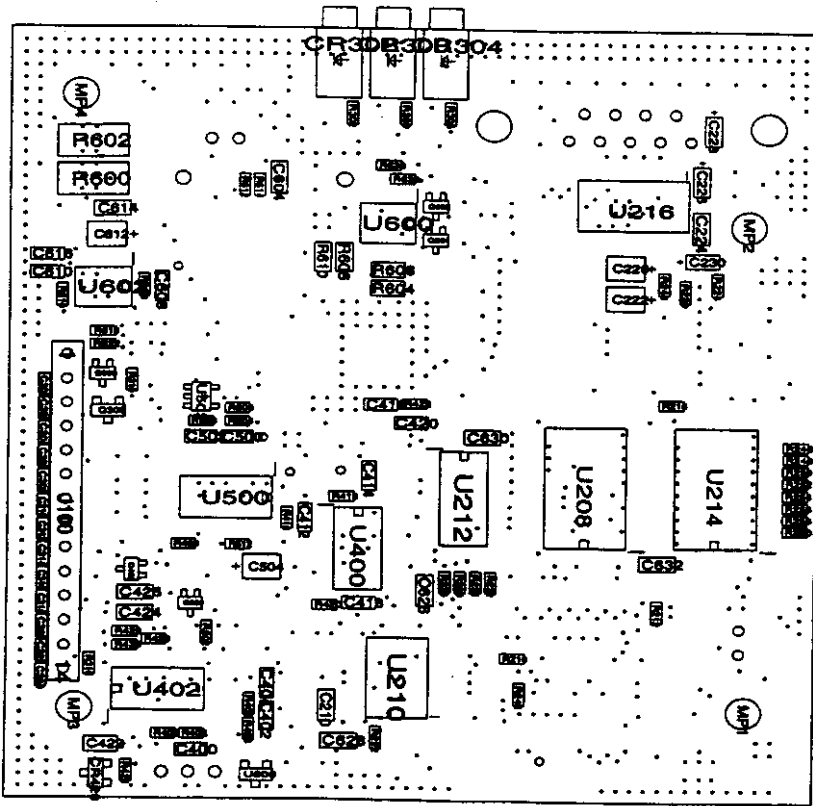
3286 Modem Board Component Layout (Bottom)
